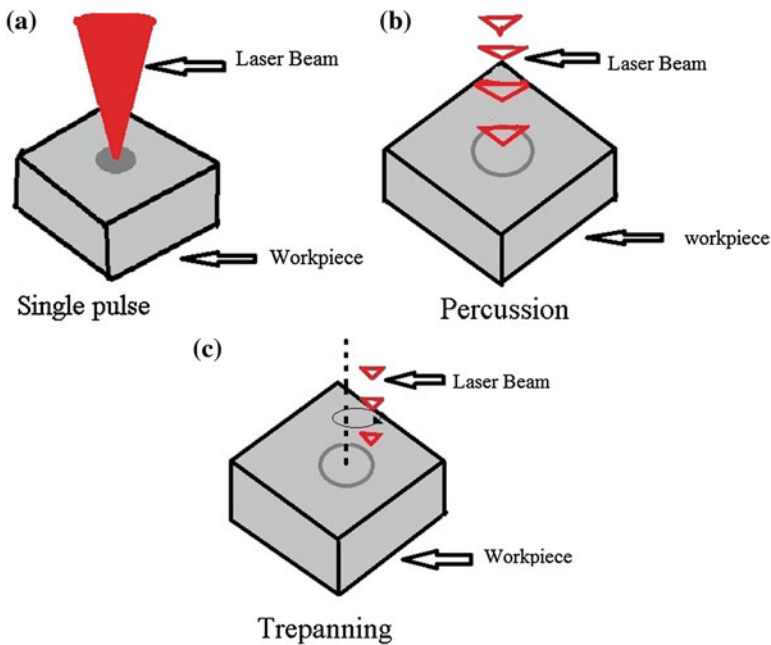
Types of laser drilling. a Single pulse laser drilling. b Percussion laser drilling. c Trepanning laser drilling
